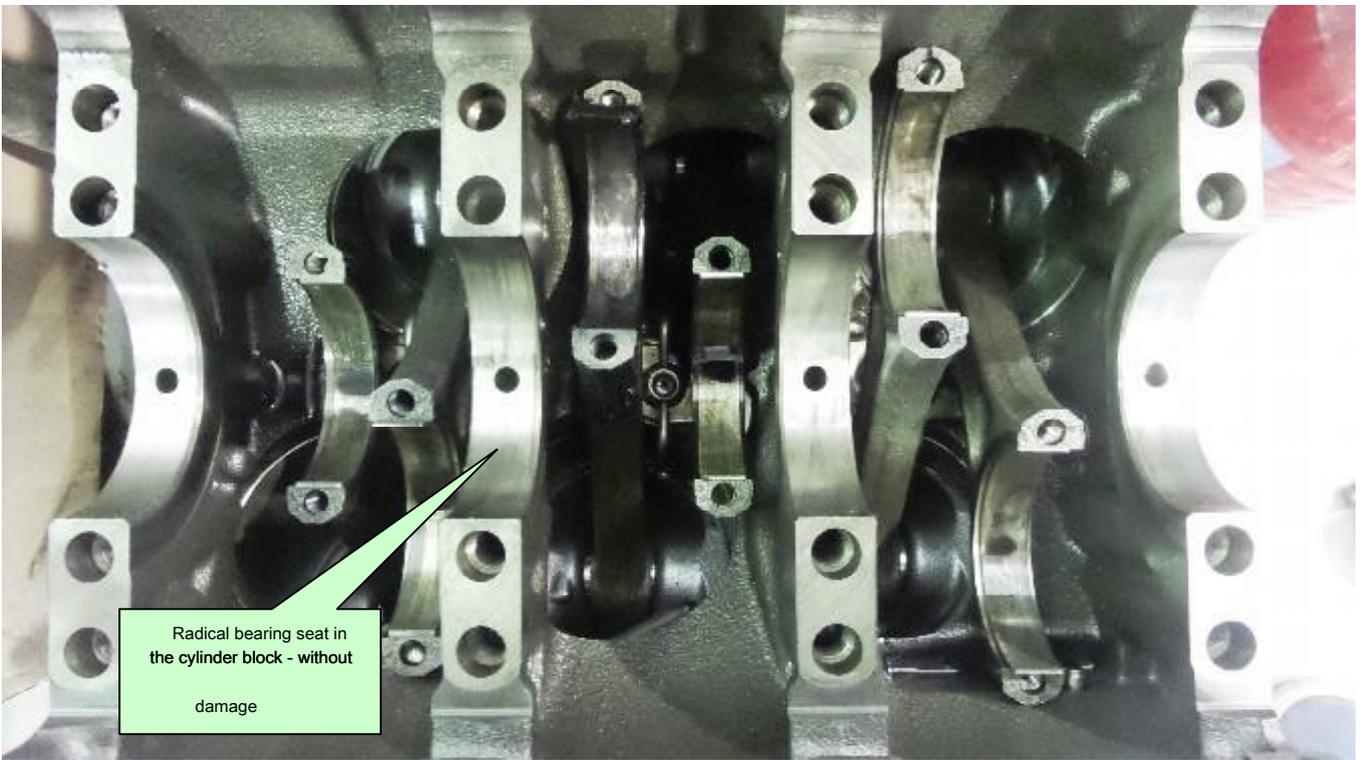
Status of indigenous necks after removing the crankshaft of the test engine car LAND ROVER
